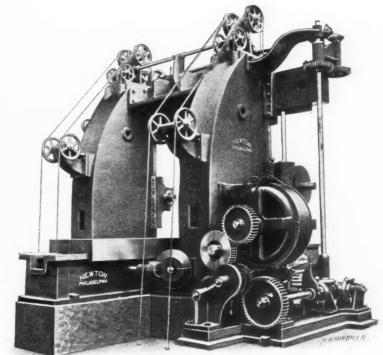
Rear View of Four-spindle Milling Machine, showing Driving Gearing.
